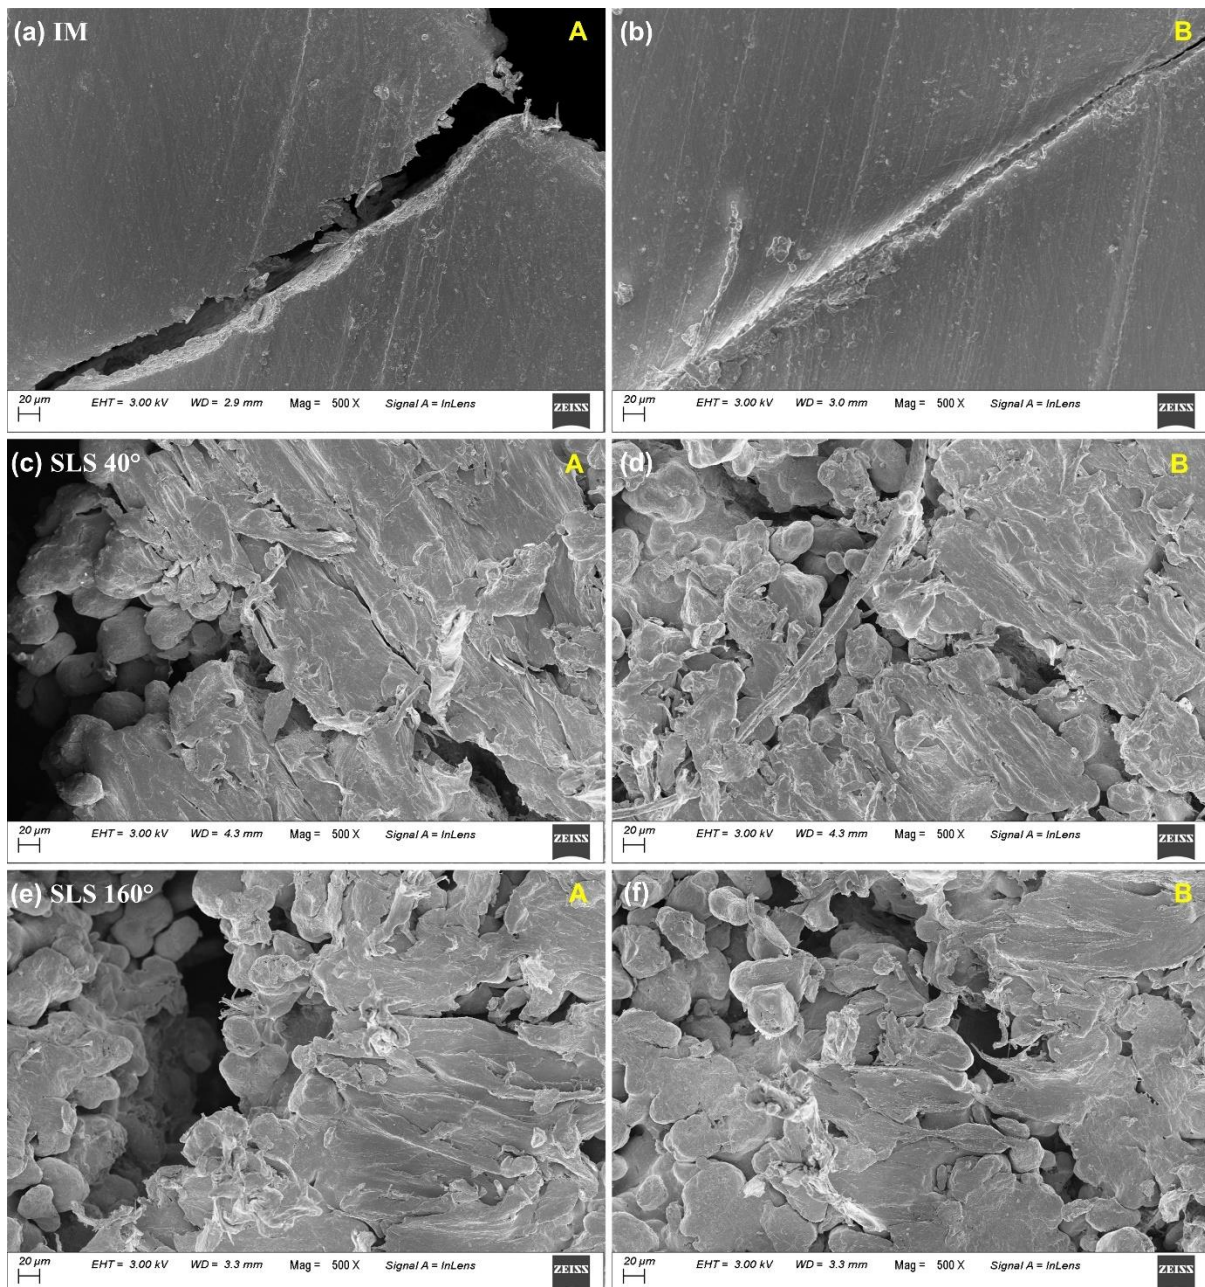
Magnified view of the bending fatigue cracks as observed under FESEM: (a, b) Injection-molded gear, (c, d) Selective laser sintered gear tooth 40° configuration and (e, f) Selective laser sintered gear tooth 160° configuration.
